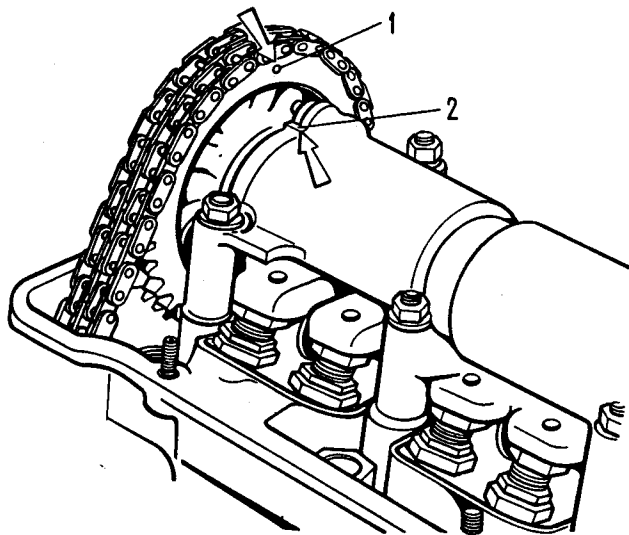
Alignment of Timing Marks on Camshaft Sprocket and on Bearing Housing:
